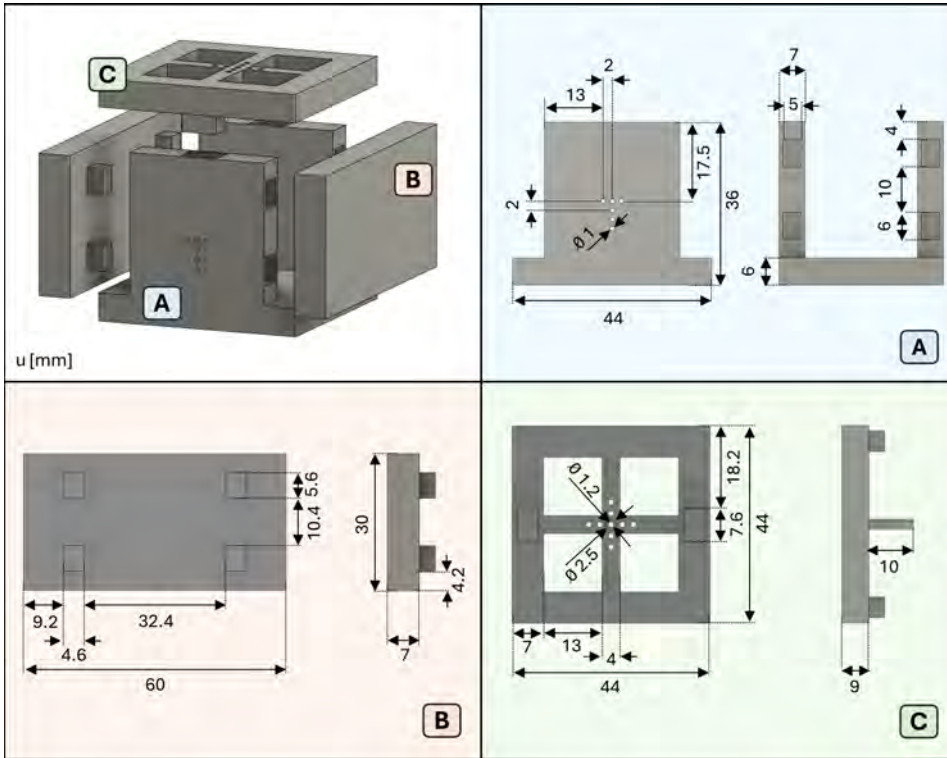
Custom holder design and composition. Three-dimensional CAD model and technical drawings of the custom holder developed for laser ablation experiments. The assembly consists of three main components: the base (A), designed with 1 mm holes to accommodate the optical fibers for temperature monitoring; the lateral wall (B), providing structural stability and mechanical coupling to the base; and the top hat (C), which incorporates an extruded guiding channel to precisely align the laser delivery fiber. The detailed dimensional views highlight the spatial arrangement of the components and the precise positioning tolerances (± 0.1 mm) that ensure reproducibility in the relative placement of the FBG sensors and the laser applicator during experimental tests.
